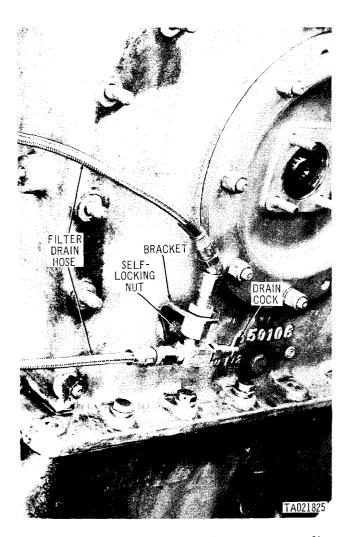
Removing or installing fuel/water separator filter drain hose.
